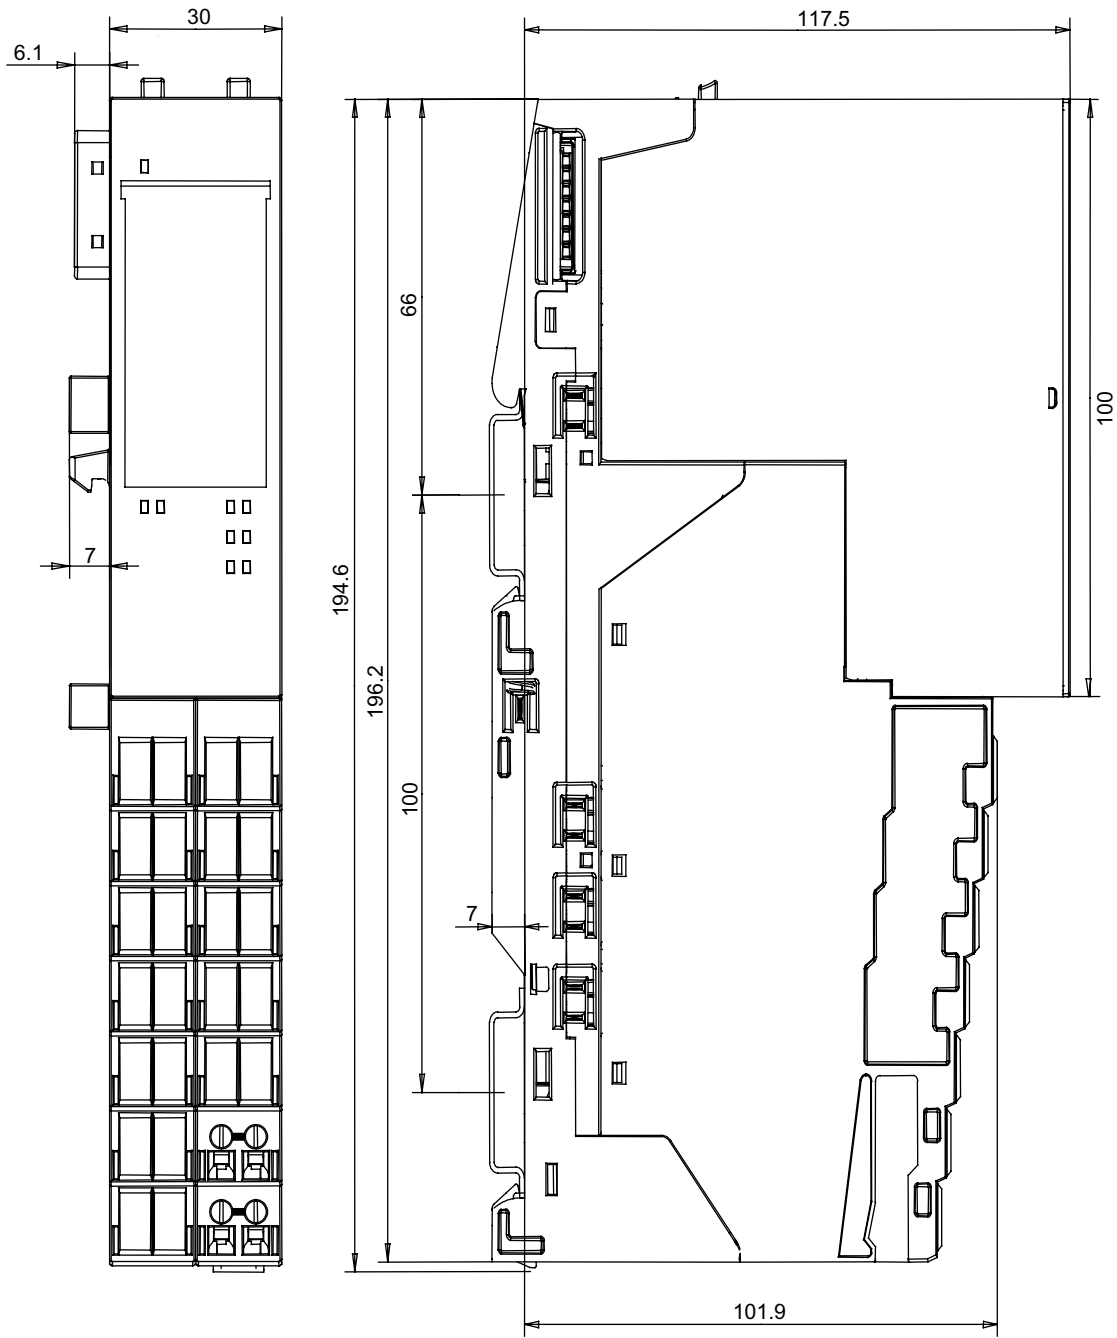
Dimension drawing of terminal module with PM-D F DC24V PROFIsafe
